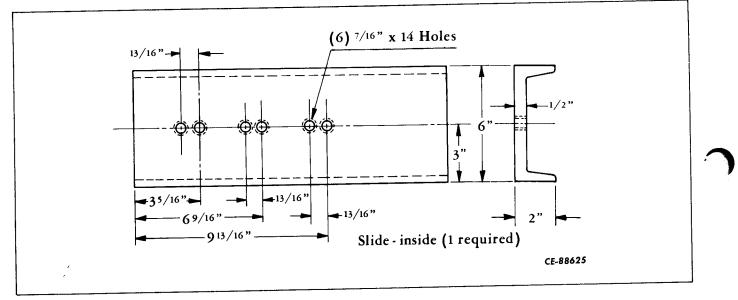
Item IV. Slide-Stand Weldment (Right Hand).
